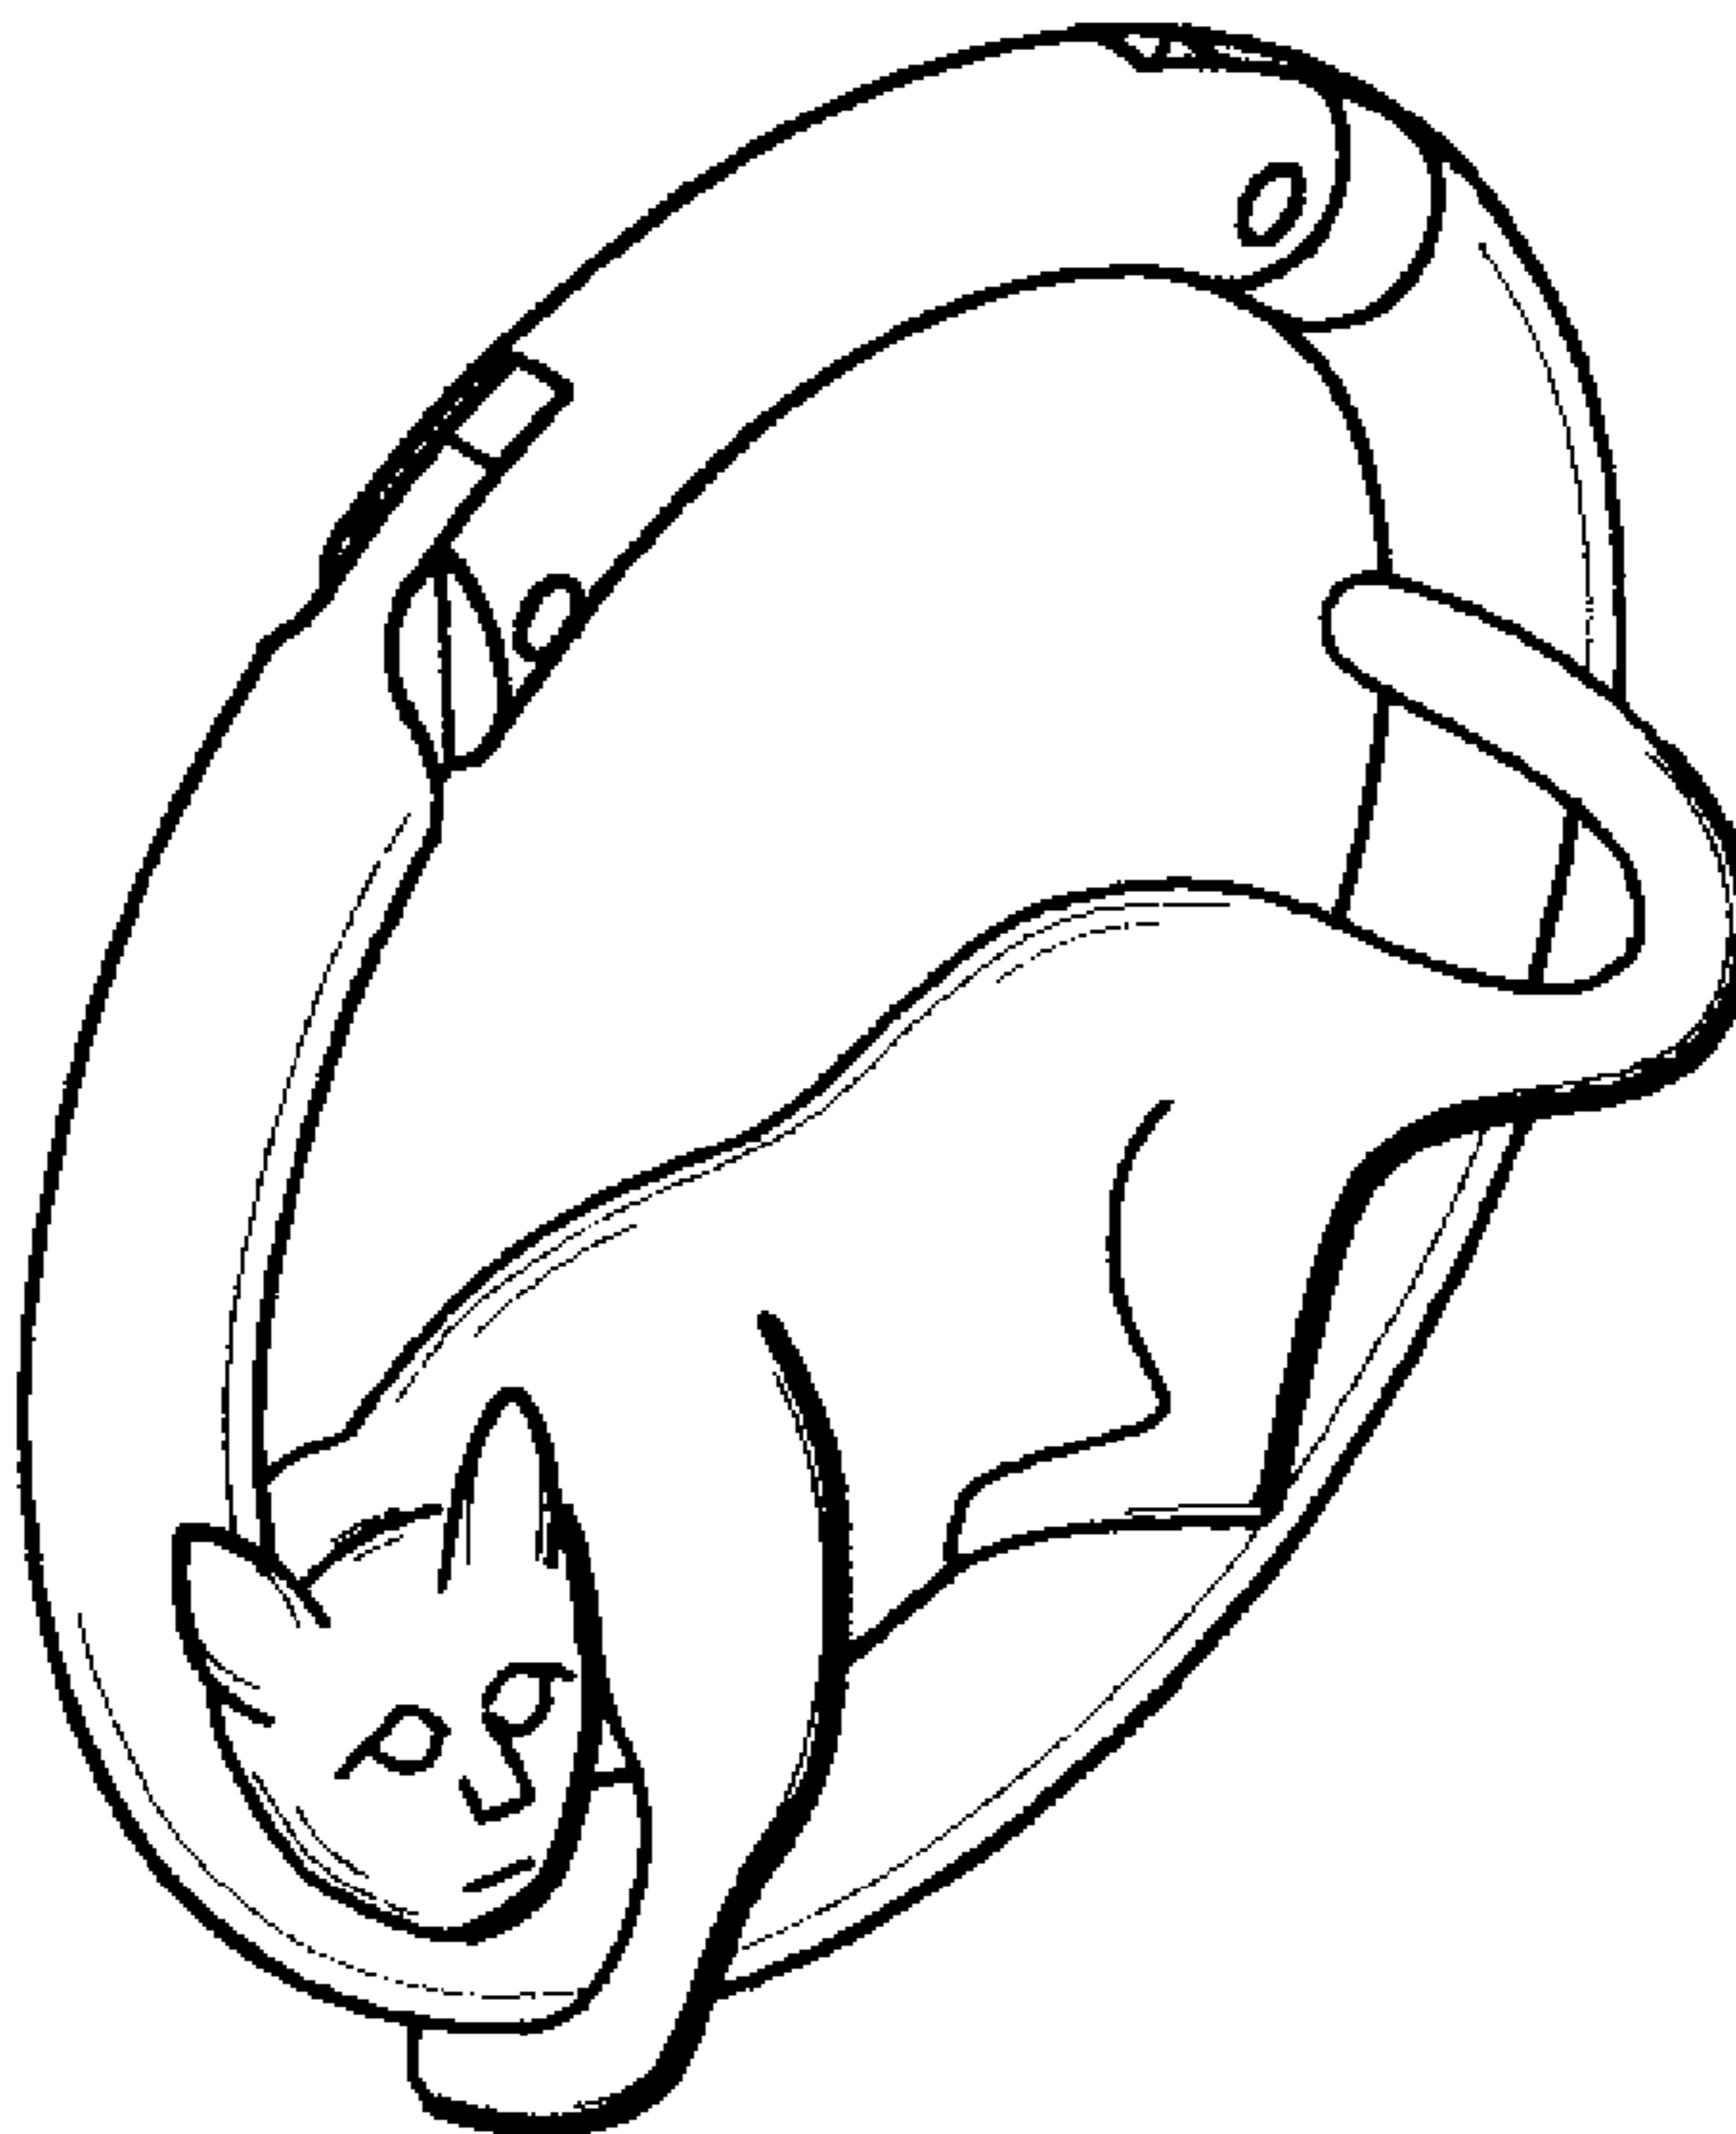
is a front side elevation view of the carabiner shown in FIG. 1.
